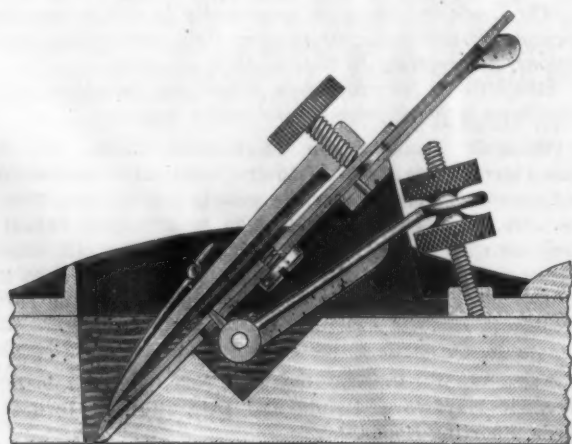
Sectional View of Wood Bottom Plane, Locking Lever Adjustment.
